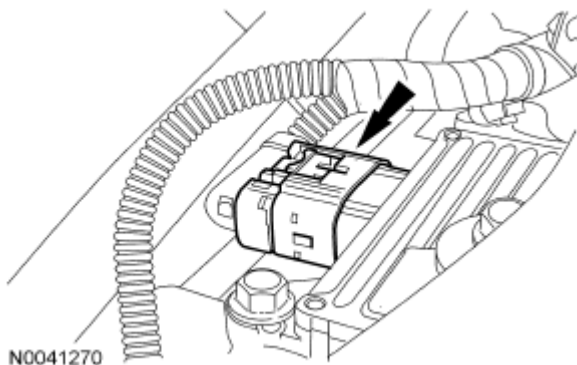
Locating Transmission Control Module (TCM) Electrical Connector
